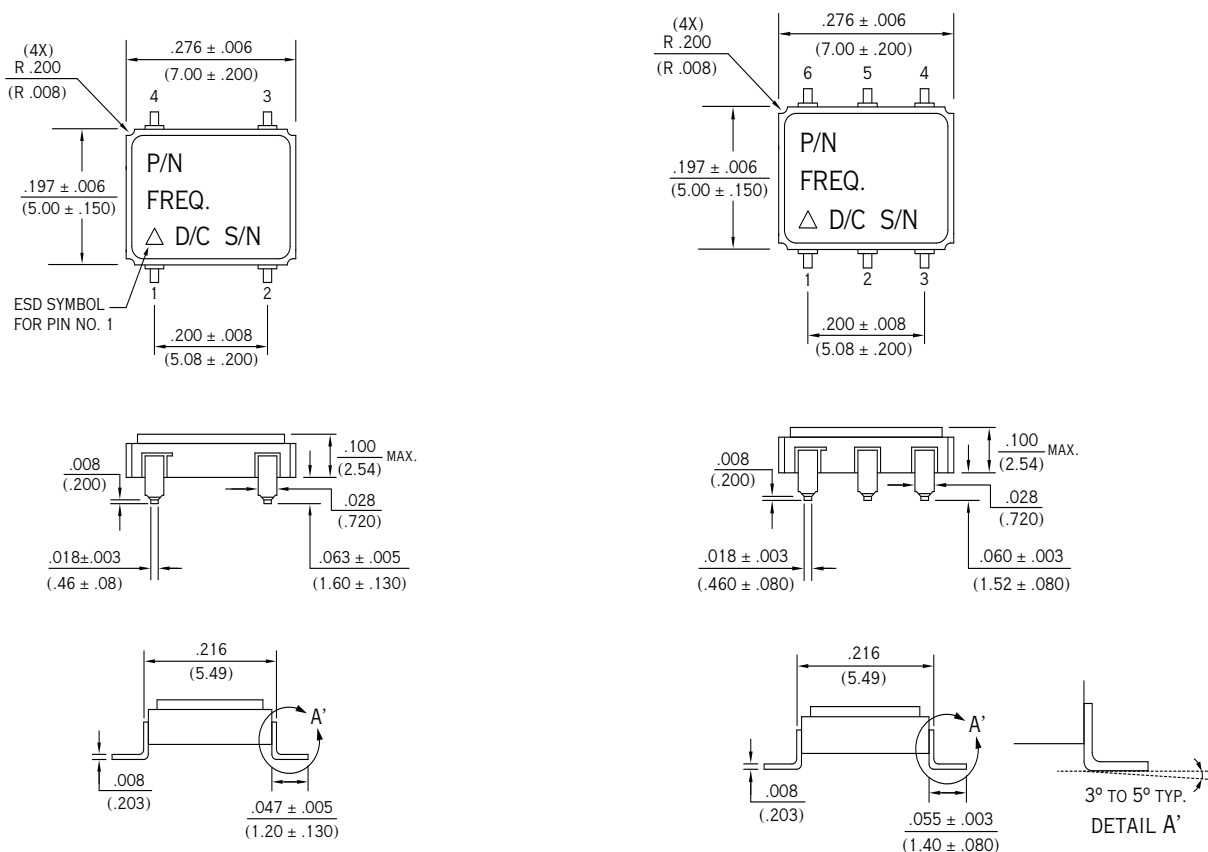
QT784 and QT785 Package Drawing and Pin Outputs
